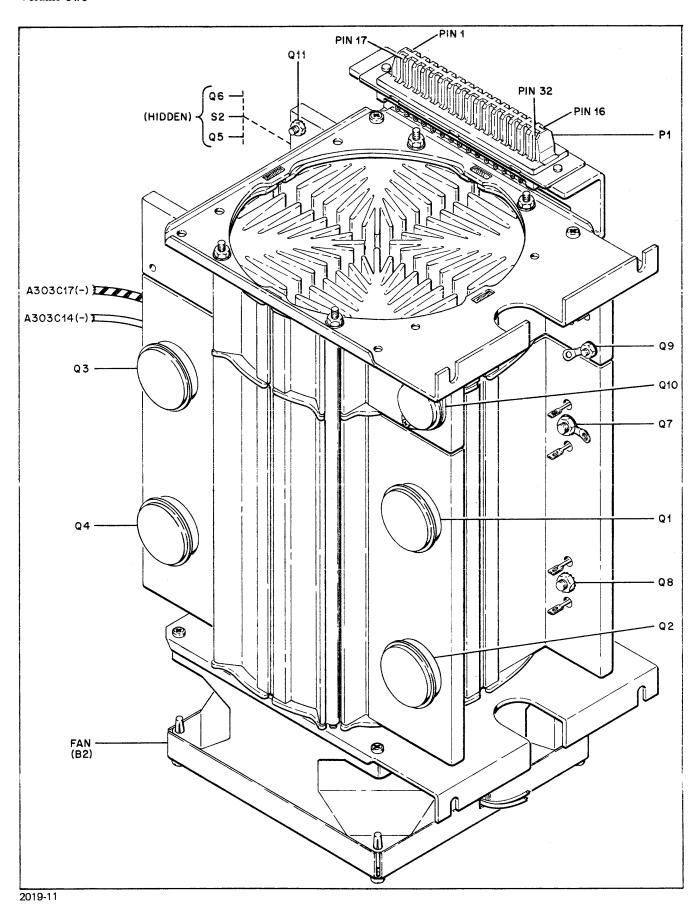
A304 Large Heat Sink Assembly, Parts Location and Connection Diagram (Sheet 2 of 2)
